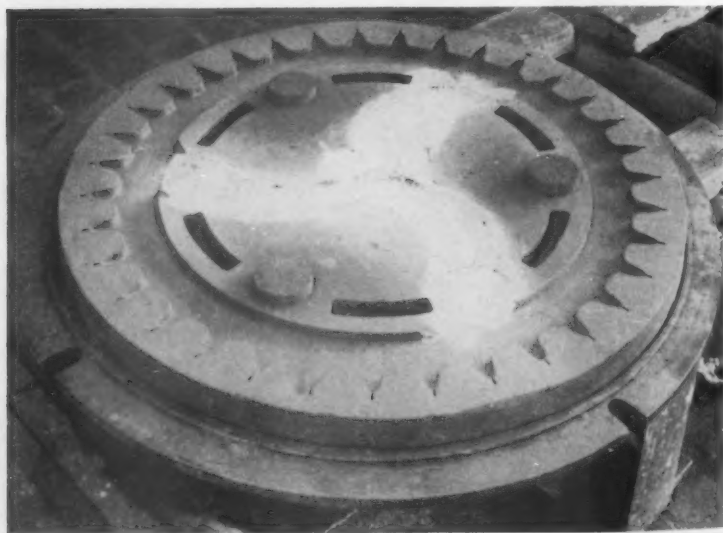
BOTTOM DRAG CORE FOR SPROCKET CASTING. NOTE RUNNER GATES THROUGH WHICH ALL METAL PASSES.
